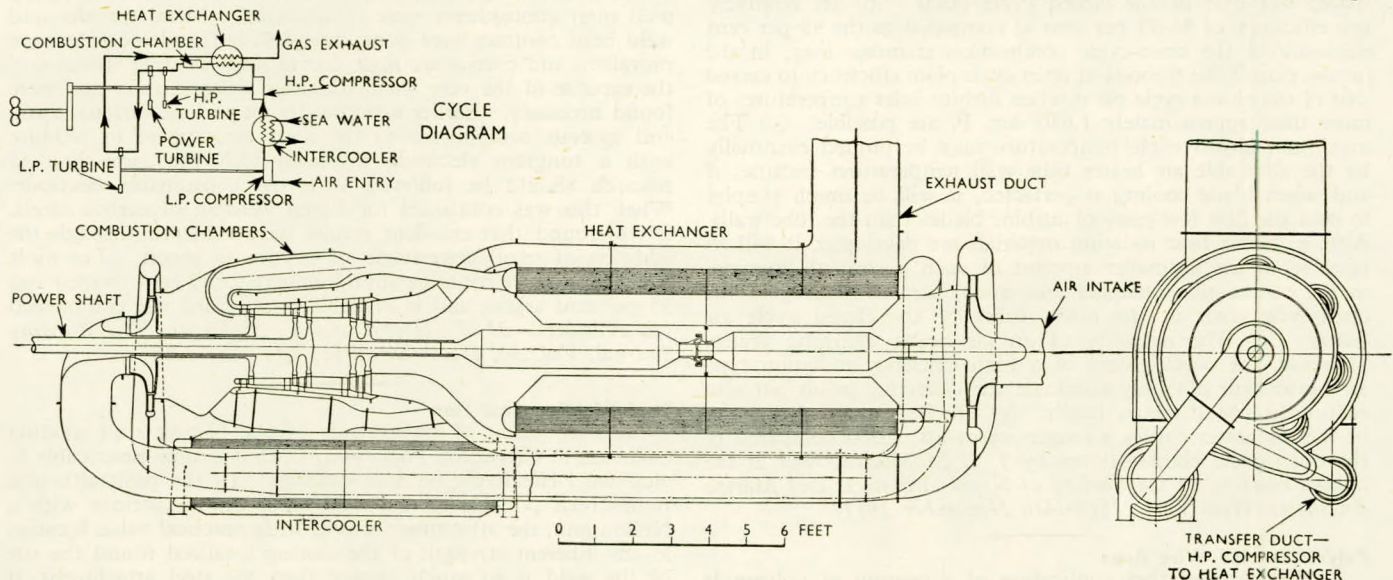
Layout of 4,000 b.h.p. gas turbine
